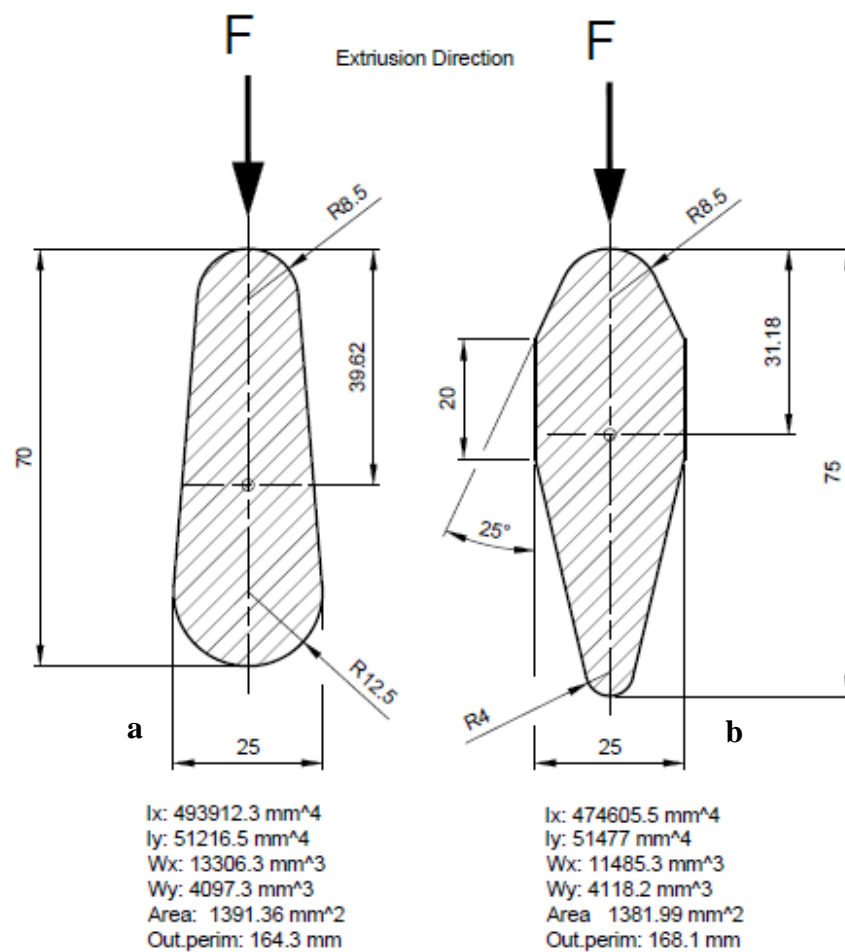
Two bridge shapes (a) torpedo bridge shape and (b) traditional bridge shape
